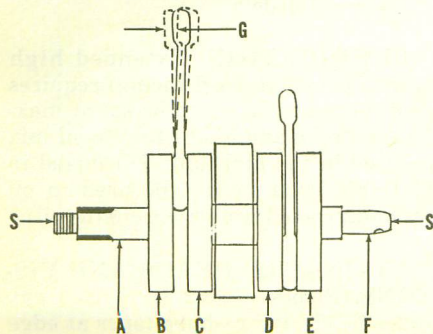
Refer to text for checking crankshaft assembly and wear limits.
